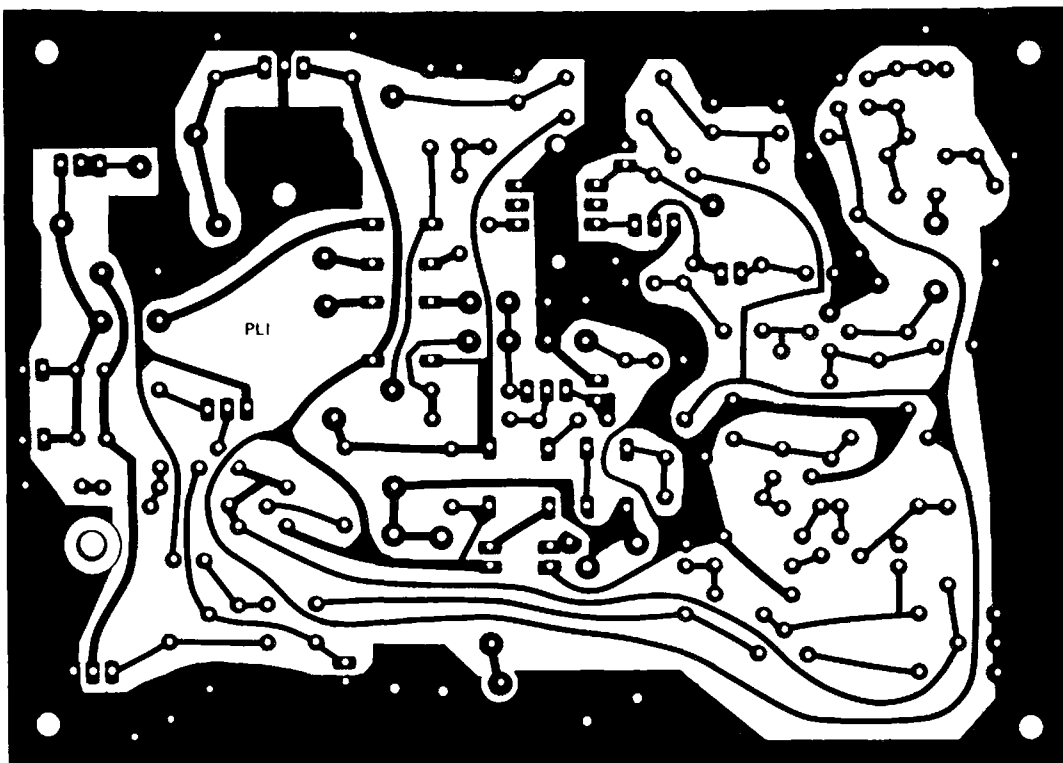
Parts layout and foil diagram, from the component side of the circuit board. Be sure to use a good quality rosin core solder and a clean soldering iron tip, with a wattage of 25 to 60 watts.
